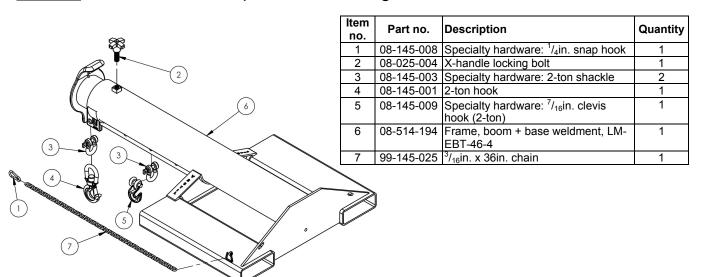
B: LMS-EBNT-46-6 Exploded Parts Diagram & Bill of Materials
